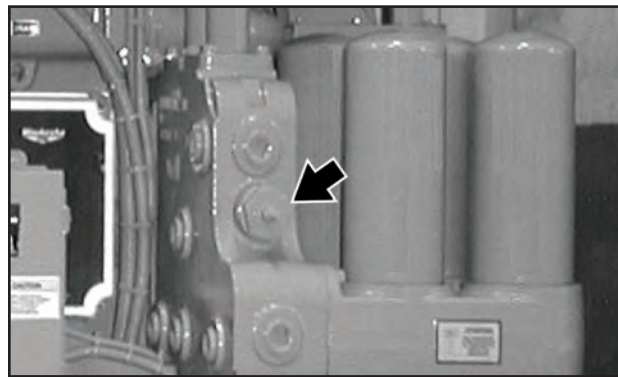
12-cylinder front gear housing - pressure regulating valve
